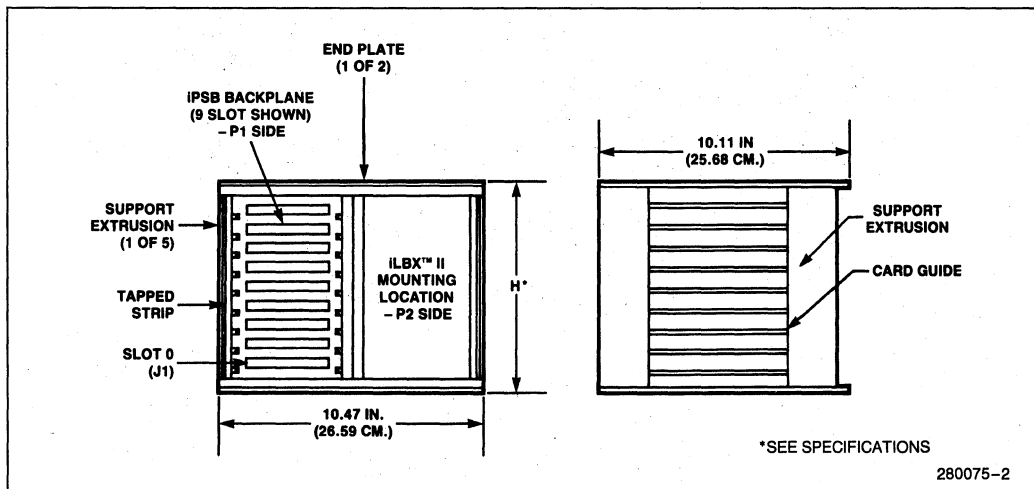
Cardcage Assembly Dimensions (ISBC® PKG/609 shown)
